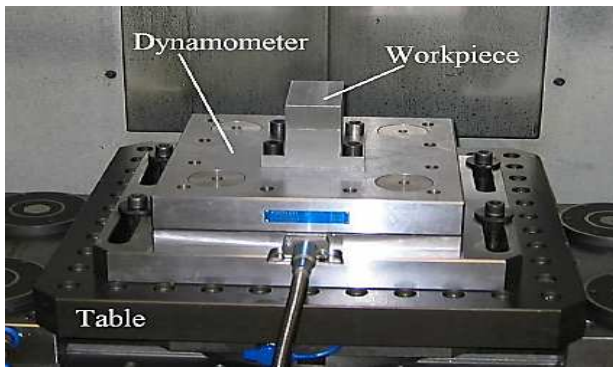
Force sensor mounted between the workpiece and the workpost table.
